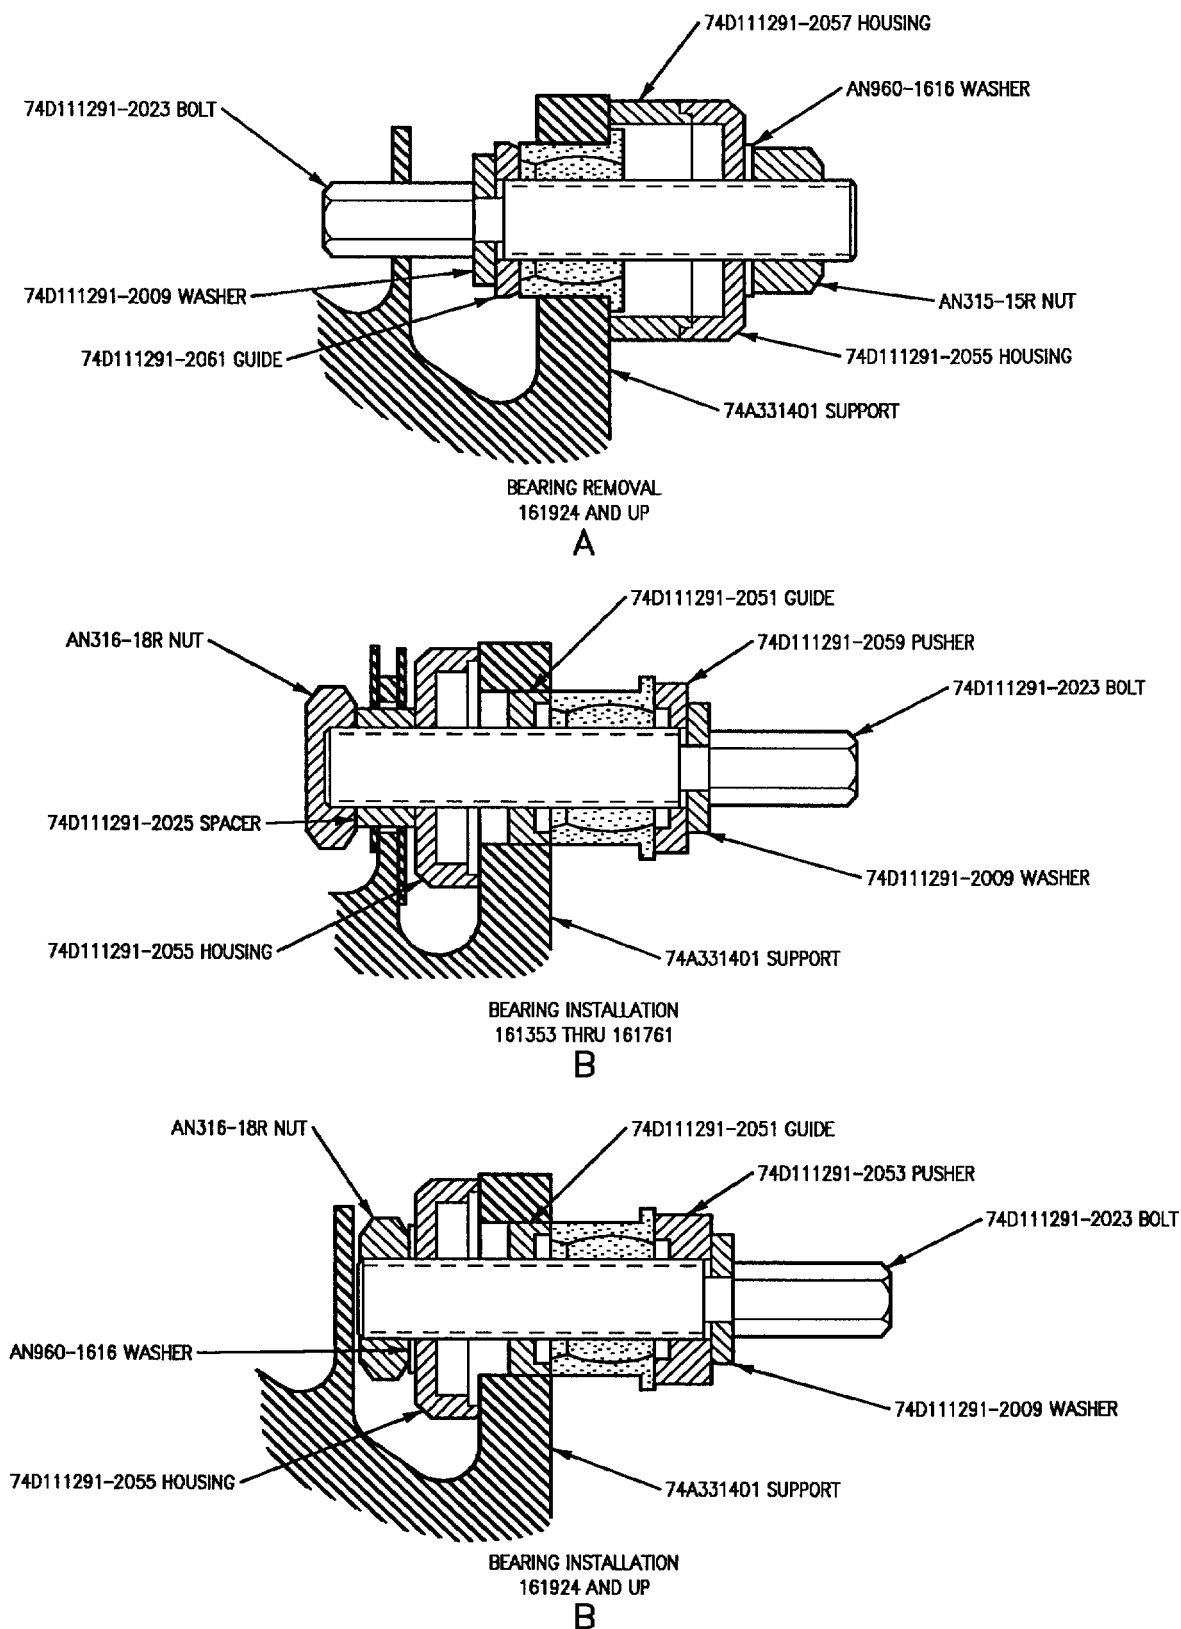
Support 74A331401, Bearing KDP16 Repair (Sheet 2)
